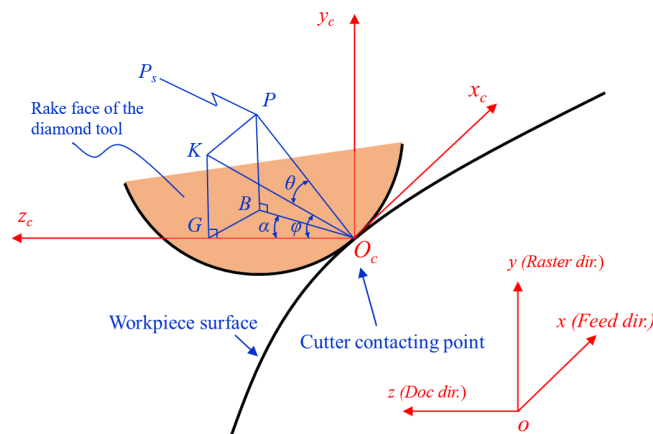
Geometrical relation between the diamond tool and the workpiece surface.
